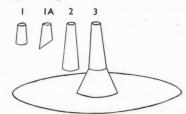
Cones for sprueing skeleton dentures. I, IA, Locator cones; 2, Hole-forming cone; 3, Main sprue-former and plate. All the cones have the same teper.
